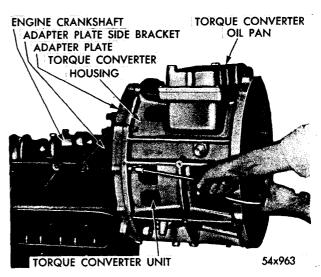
Installing or Removing Converter Housing on Adapter Plate
